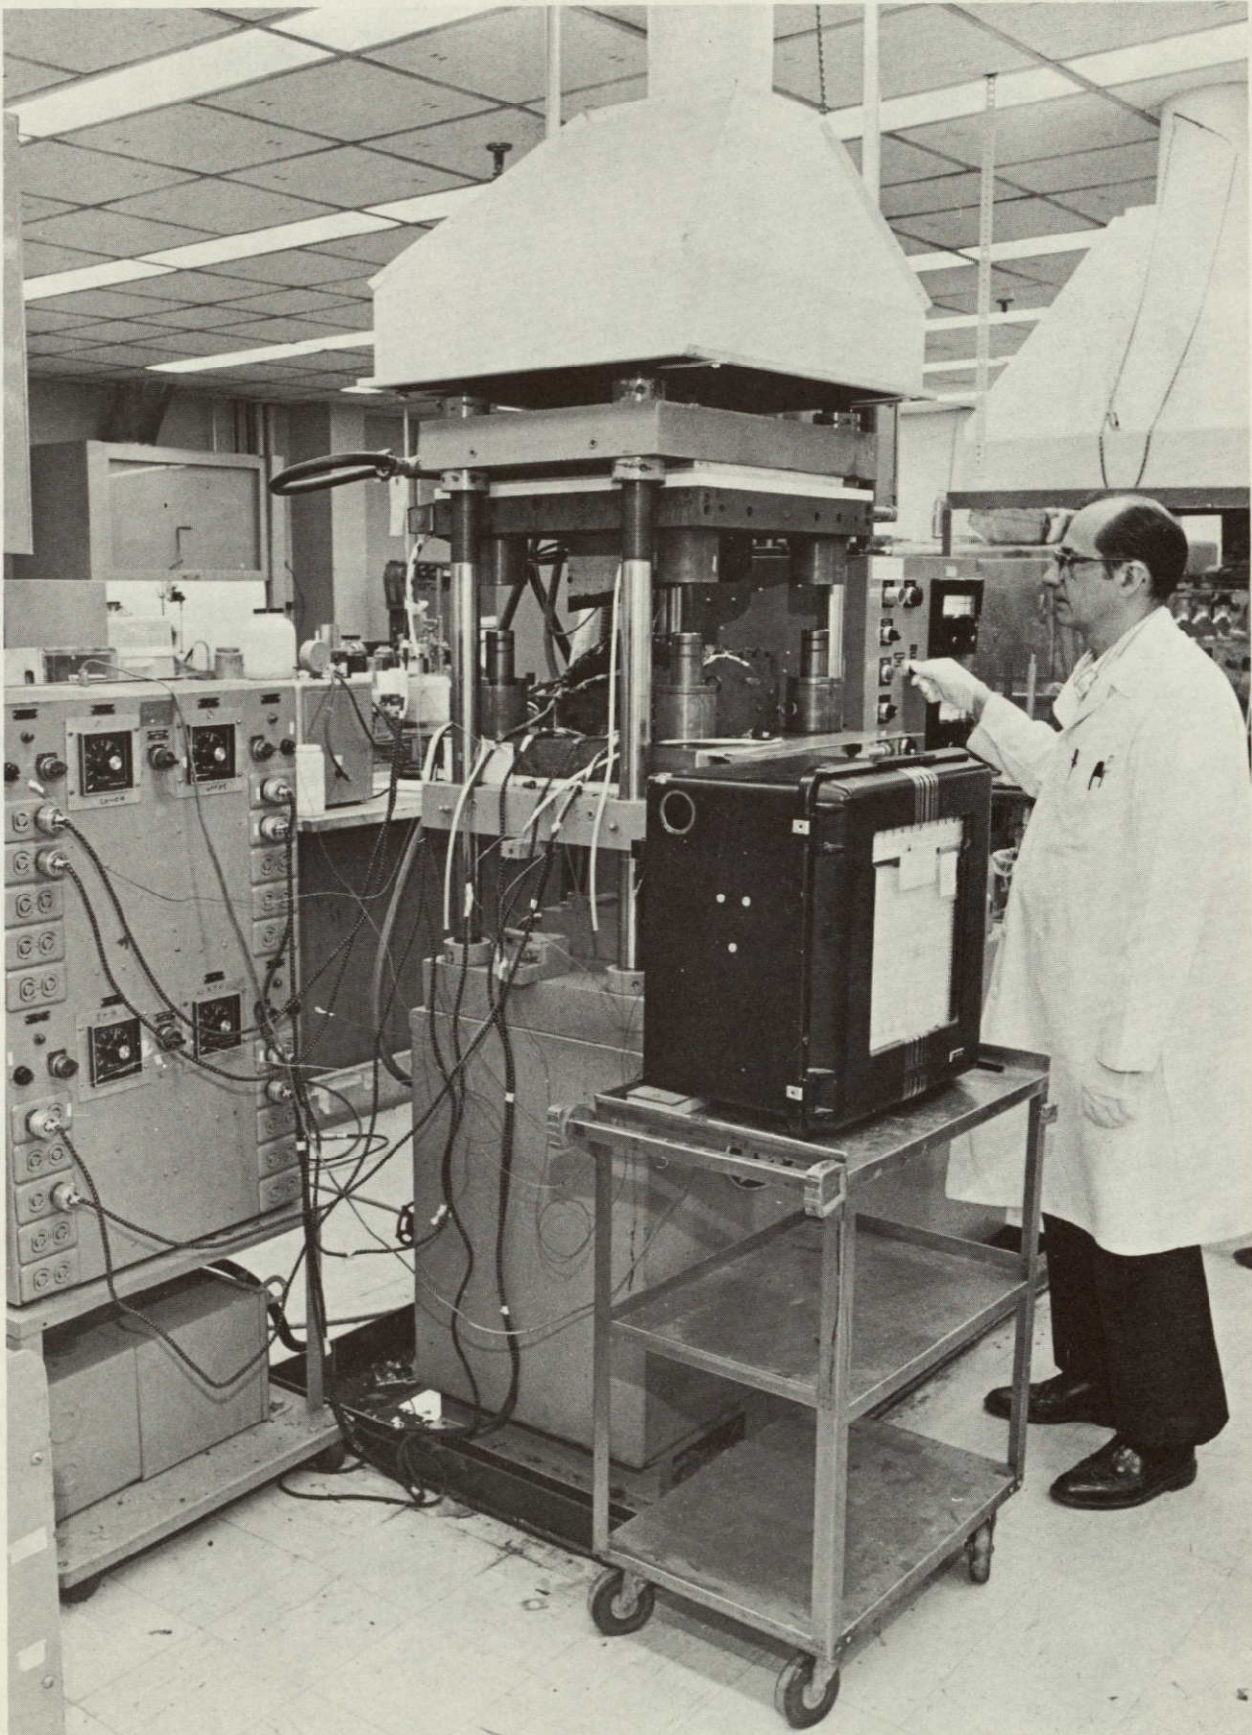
Blade Molding Press Showing Temperature Controller and Recorder.
